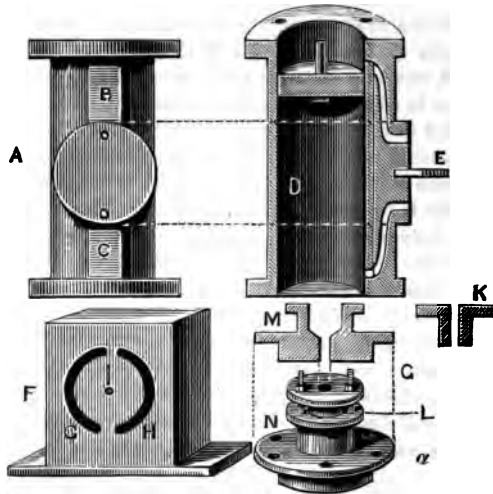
ARRANGEMENT OF DOUBLE ACTION CYLINDER ENGINES FOR STEAMBOAT.
